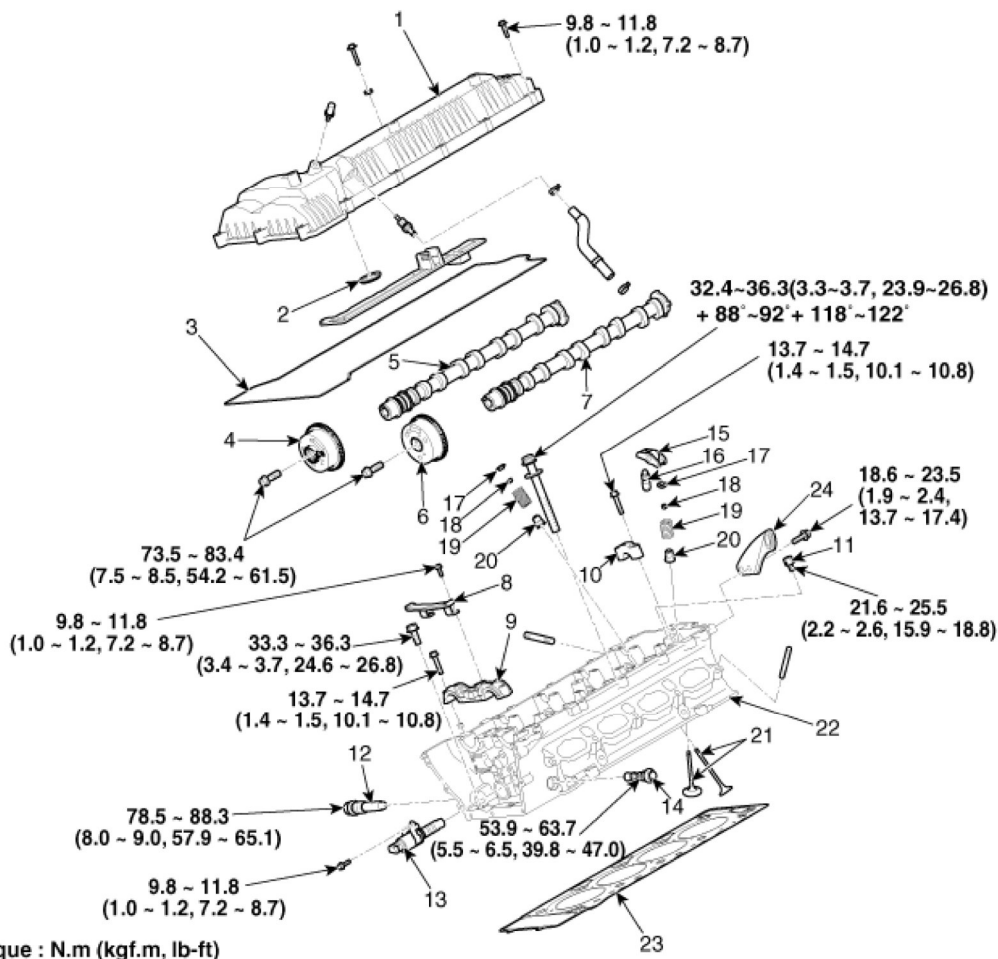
Exploded View Of RH Cylinder Head Assembly With Torque Specifications
